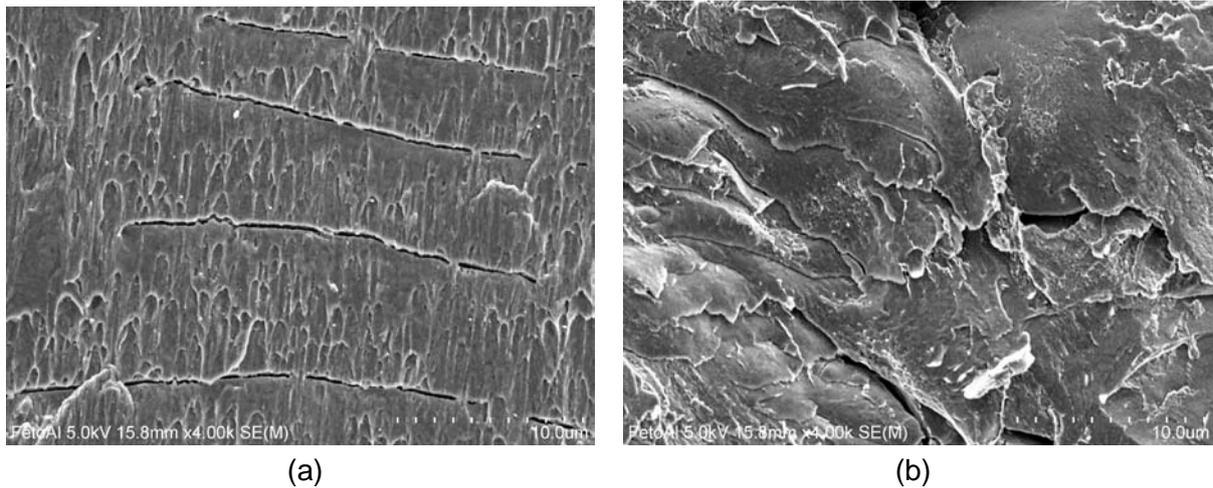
Fracture surfaces of tensile-shear tested samples of (a) Region 1 displaying heavily deformed Al on top of the intermetallic layer and (b) Region 2 displaying brittle fracture of the intermetallics.
